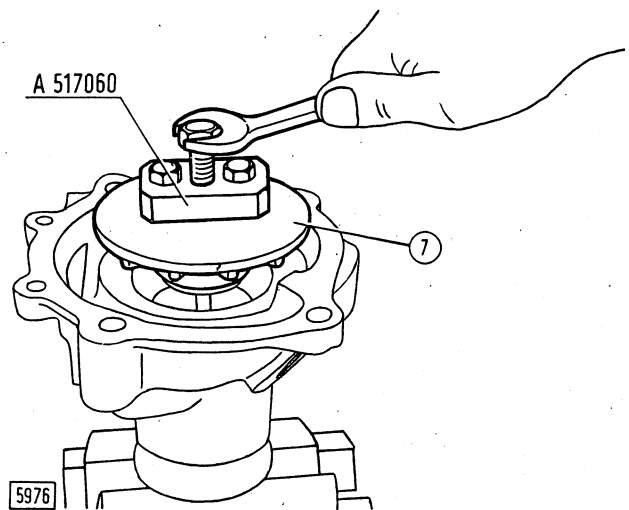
Removing the impeller (7) with puller A 517060.
